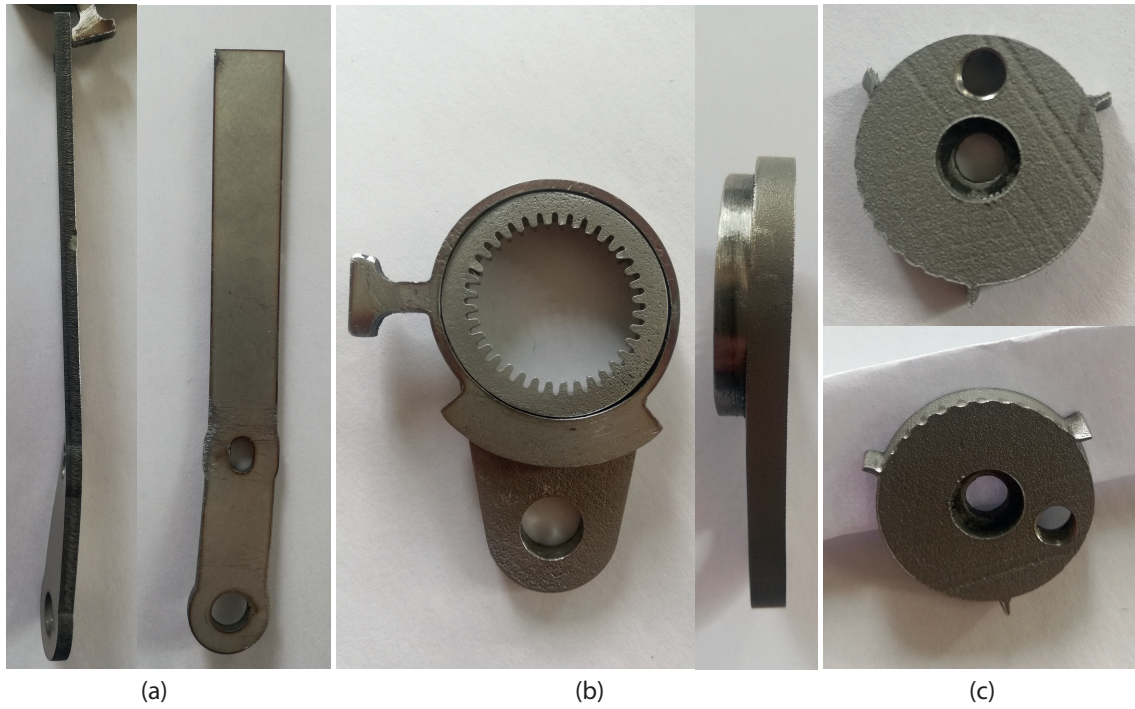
Failed components: (a) the upper bar was twisted, (b) the housing ring was no longer circular and the housing was bend, (c) two of the three gear teeth were deformed and teeth of the ring gear had left their marks.
